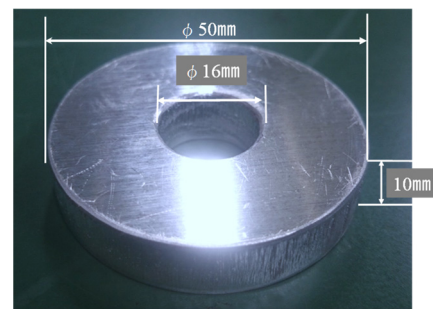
Schematic of test piece with pre-hole diameter 16mm
